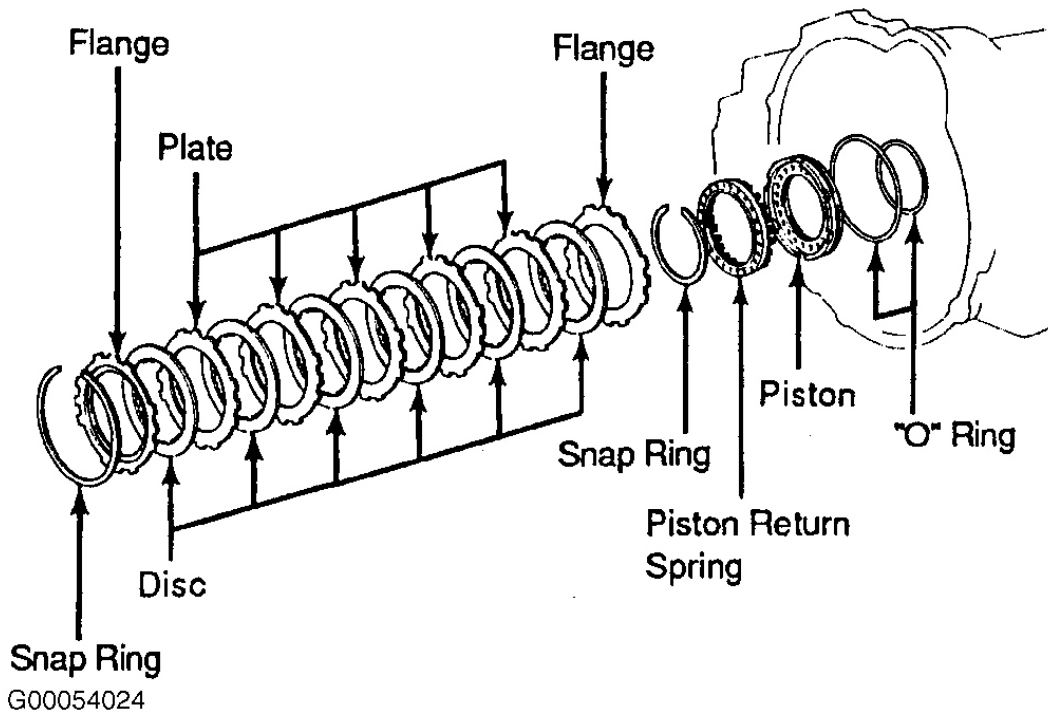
Exploded View Of 1st/Reverse Brake (Except MR2)
